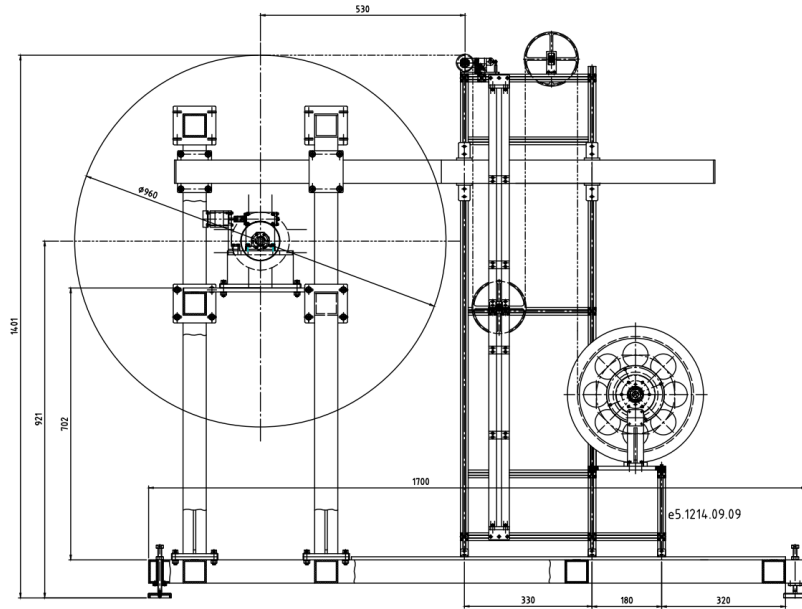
Fibre ribbon winding machine developed by TU Dortmund.
